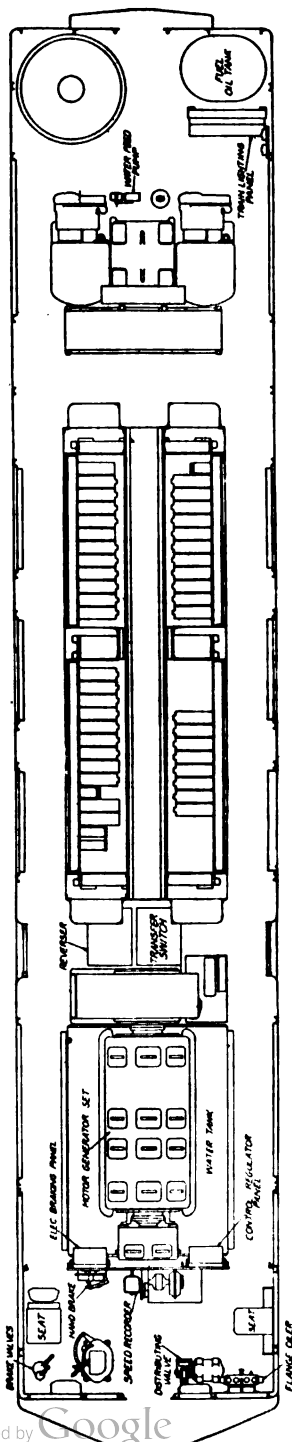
LOCATION OF APPARATUS IN ONE-HALF PASSENGER LOCOMOTIVE.
